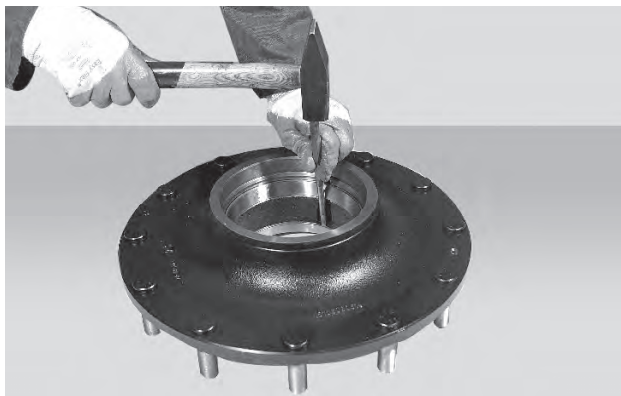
Remove the external thrust blocks of bearings (14) and (17), using a pin driver.
